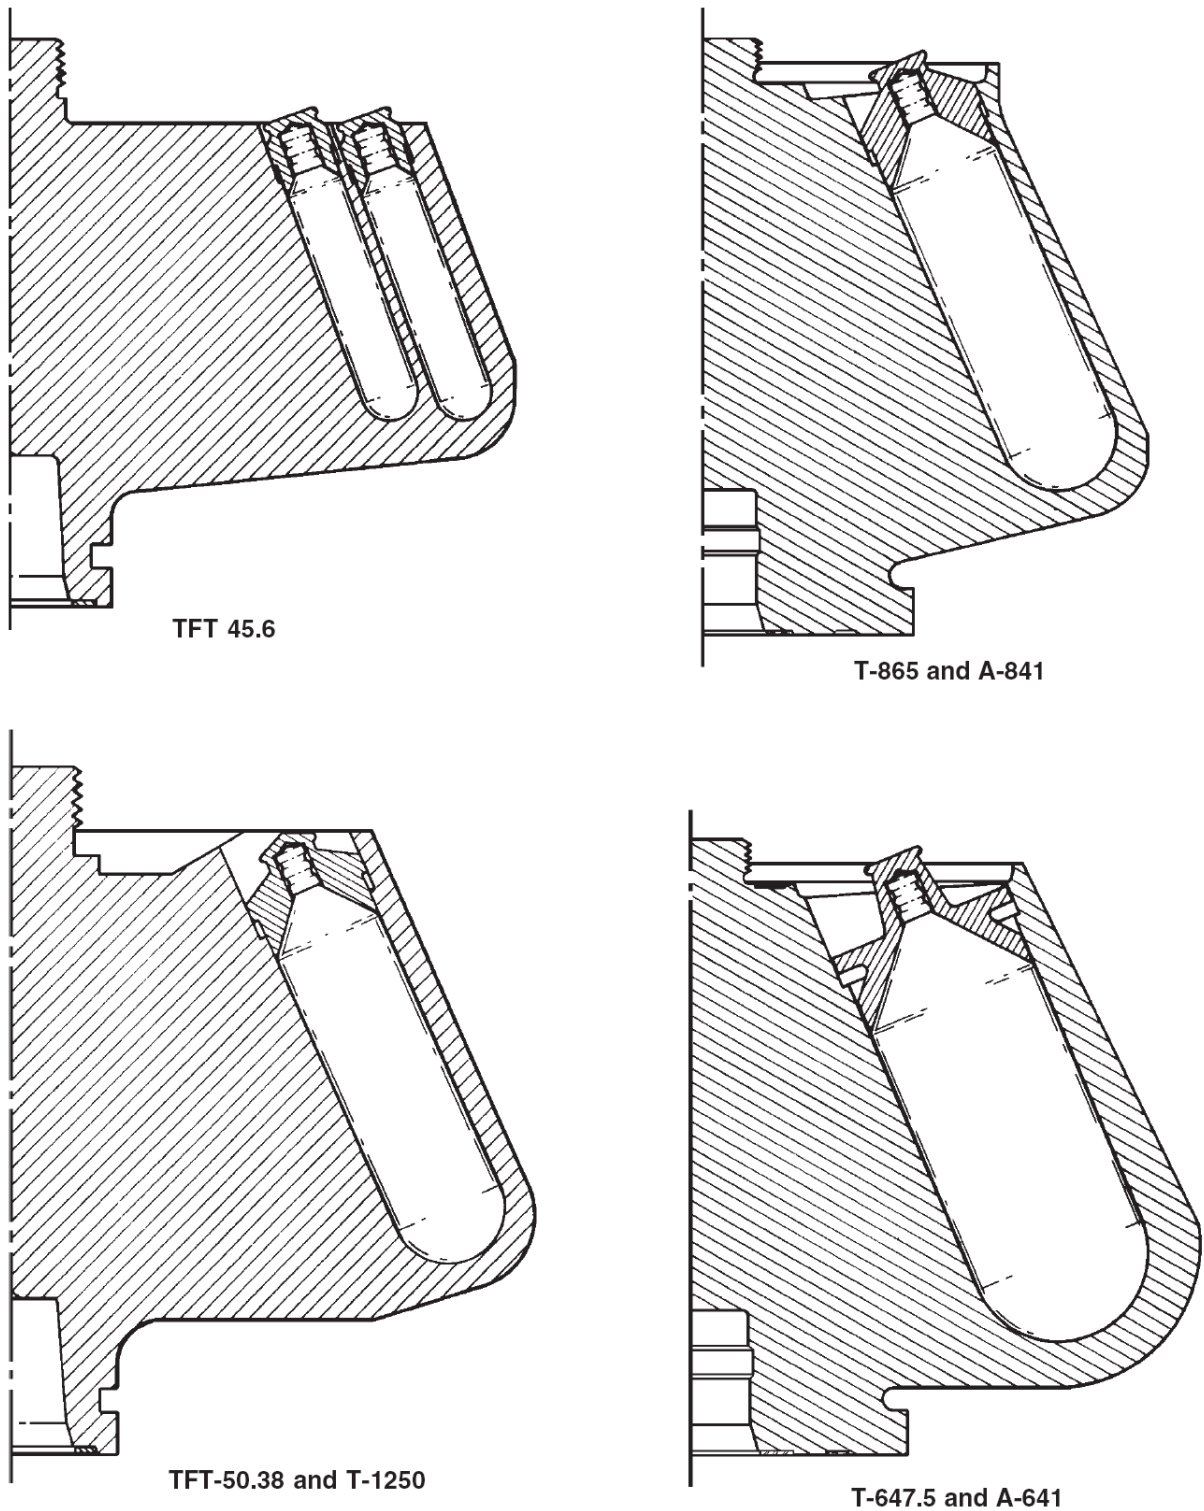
Properly Seated Rotor Caps in Ultraspeed Centrifuge Rotors (continued)
